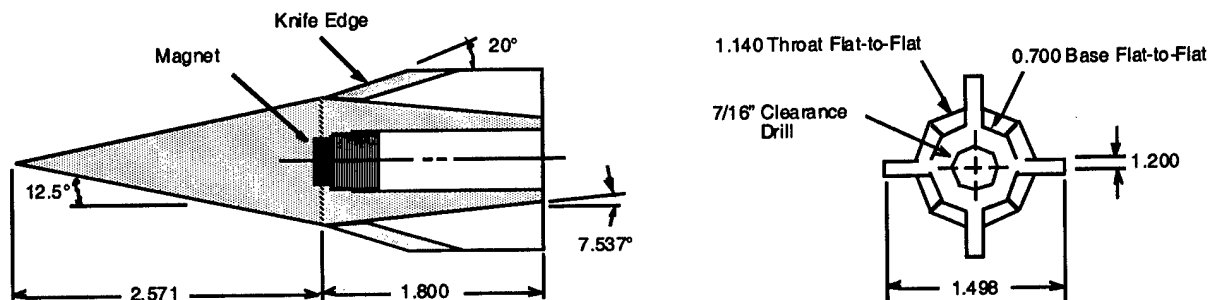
Ram accelerator projectile configuration (dimensions in inches).
